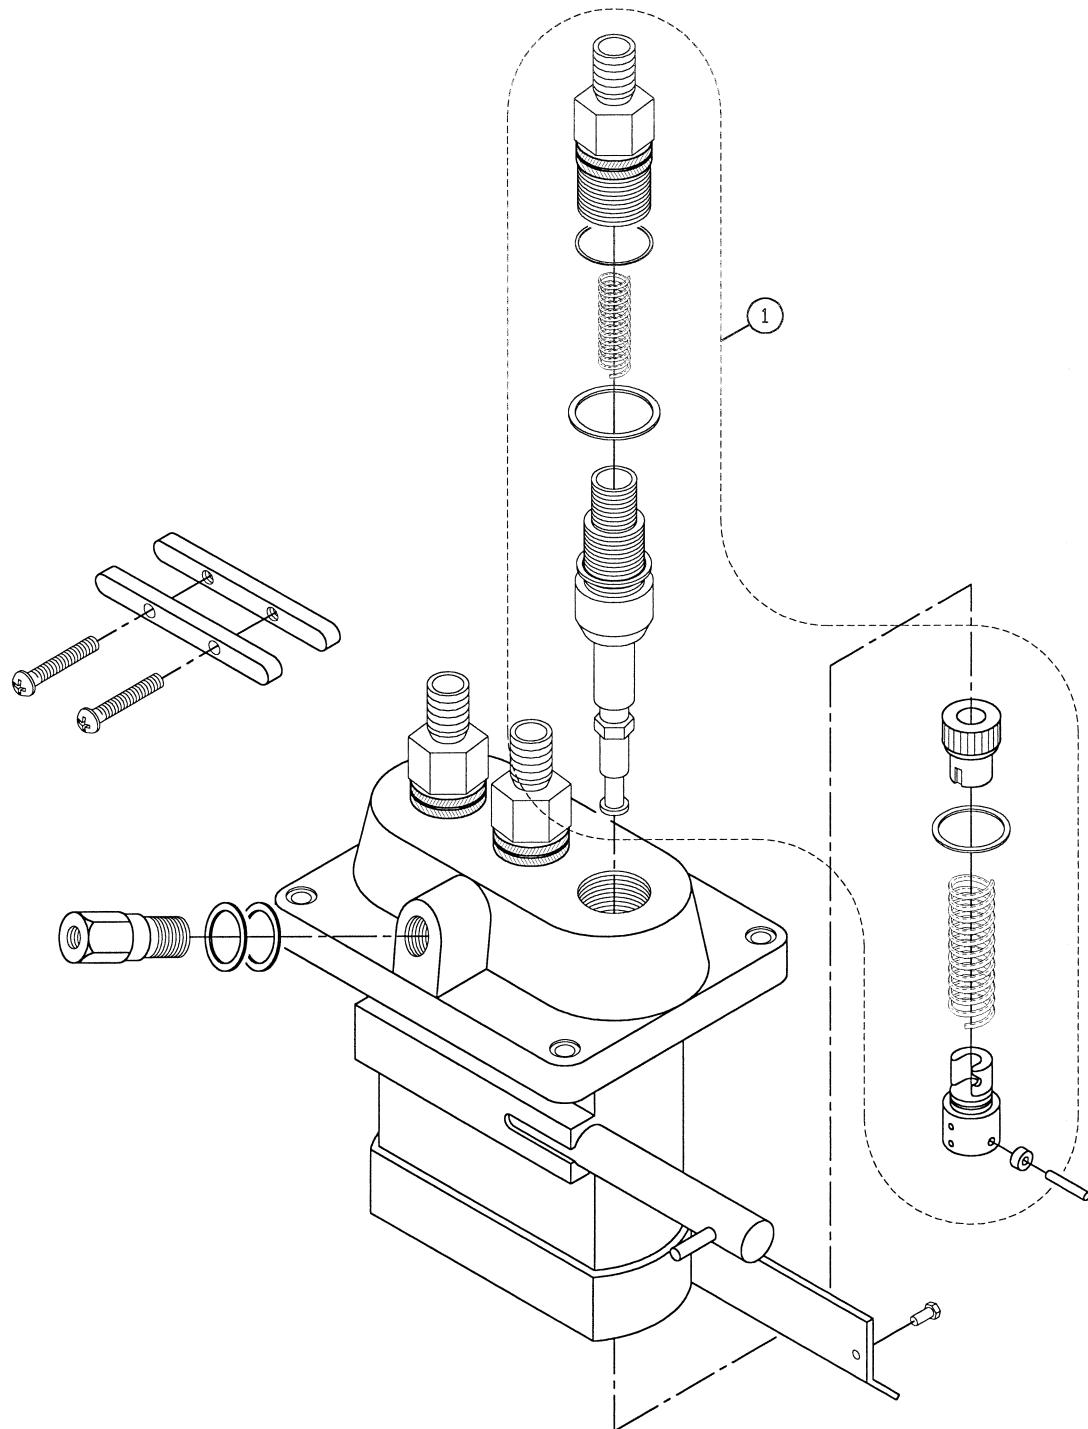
Injection Pump (Component Parts), Engine Group
